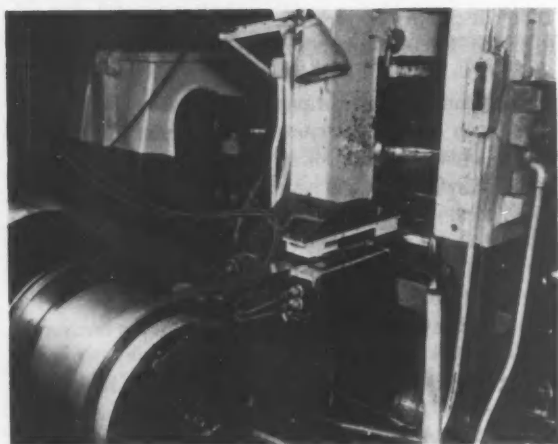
A beta ray thickness gauge in use on a sheet rolling mill (courtesy Baldwin Instrument Co Ltd)
